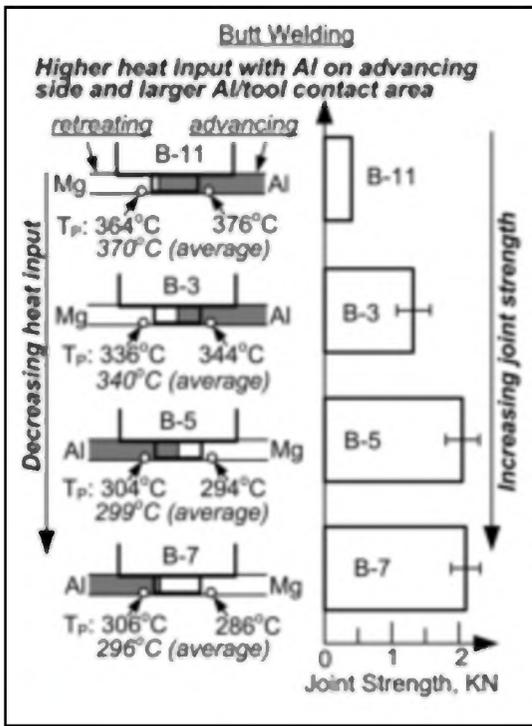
Effect of material position on joint strength and heat input in butt joint FSW of AZ31 Mg and 6061 Al. The thermocouples are 3 mm away from the path of the tool axis and 0.25 mm above the bottom surface of the workpiece.
